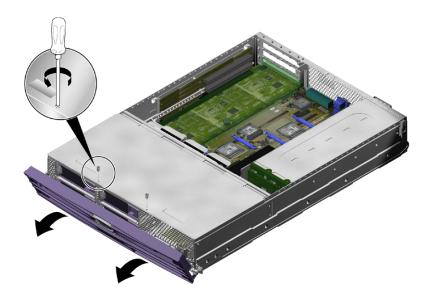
Location of Screws on the Front Section of the Cover
